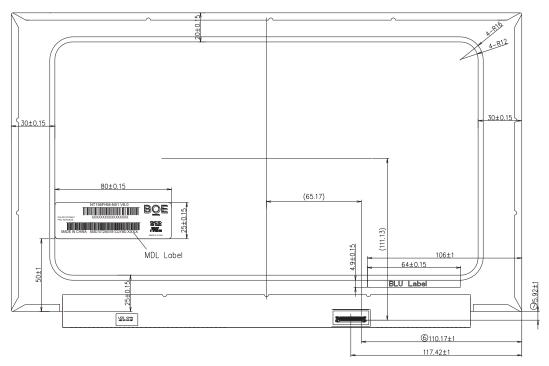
TFT-LCD Module Outline Dimensions (Rear view)
